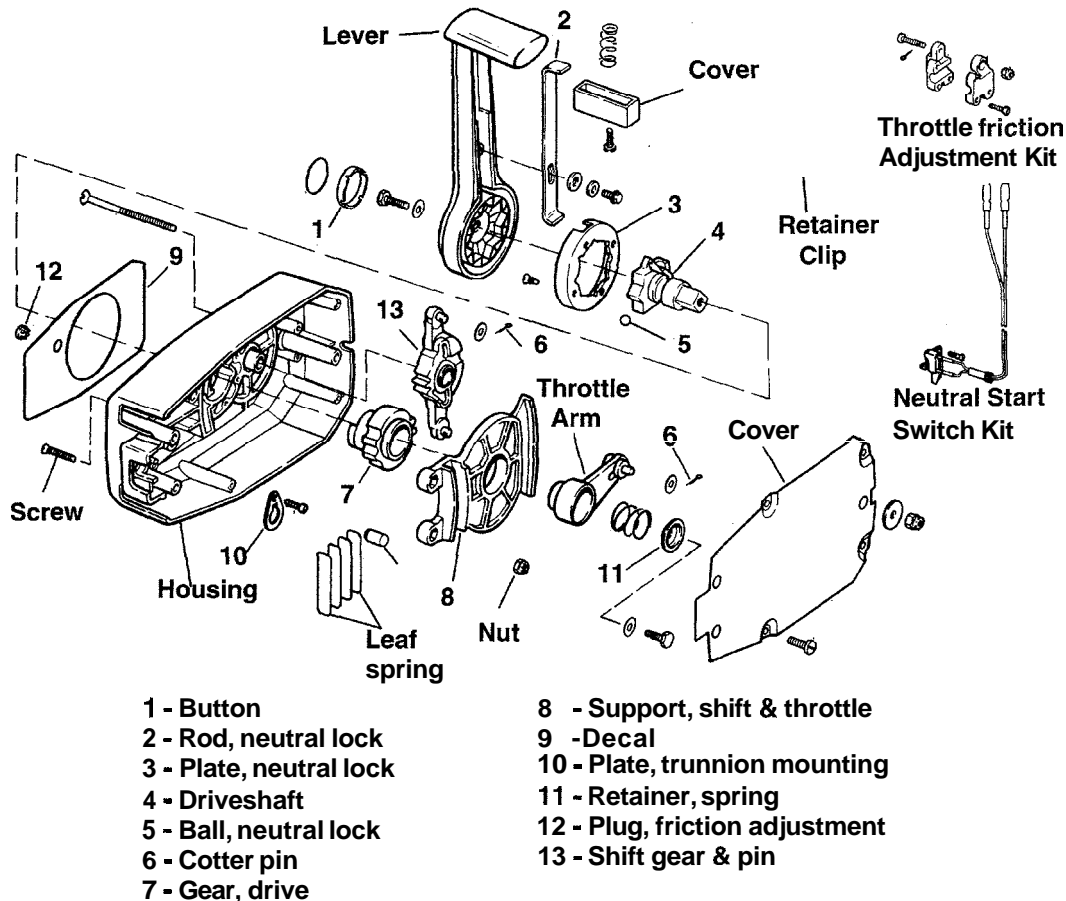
Exploded view of a typical small motor standard surface mount remote
